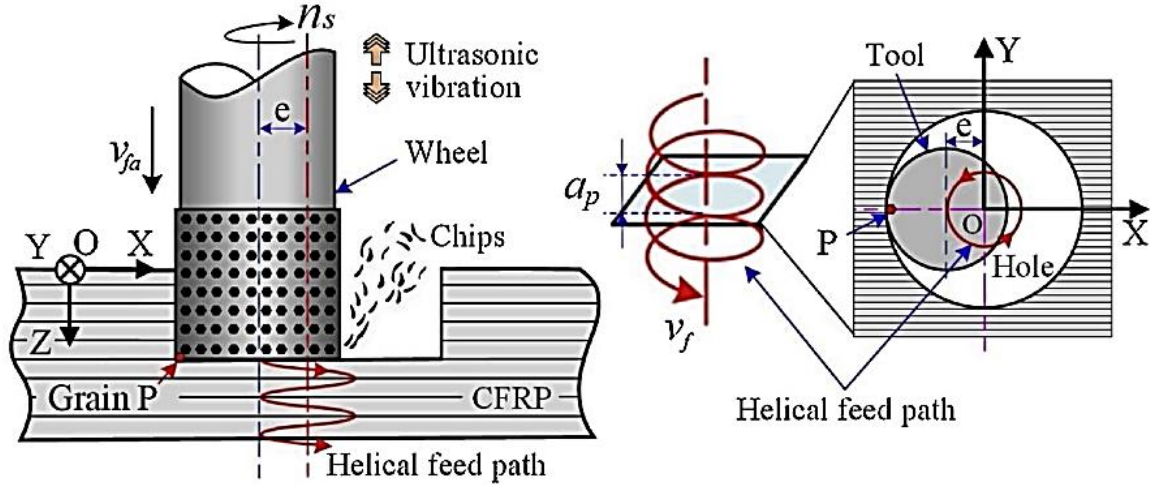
Rotary Ultrasonic Helical Machining (RUHM) (v_f – helical speed; a_p – helical revolution; e – radius of helical feed path; n_s – spindle speed; v_{fa} – axial feed speed of tool) [22].
